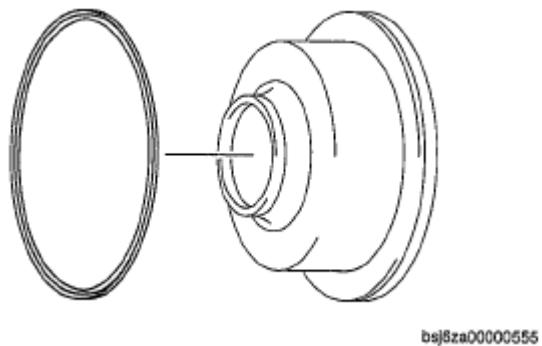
Identifying D-Ring On C1 Clutch Seal Plate
